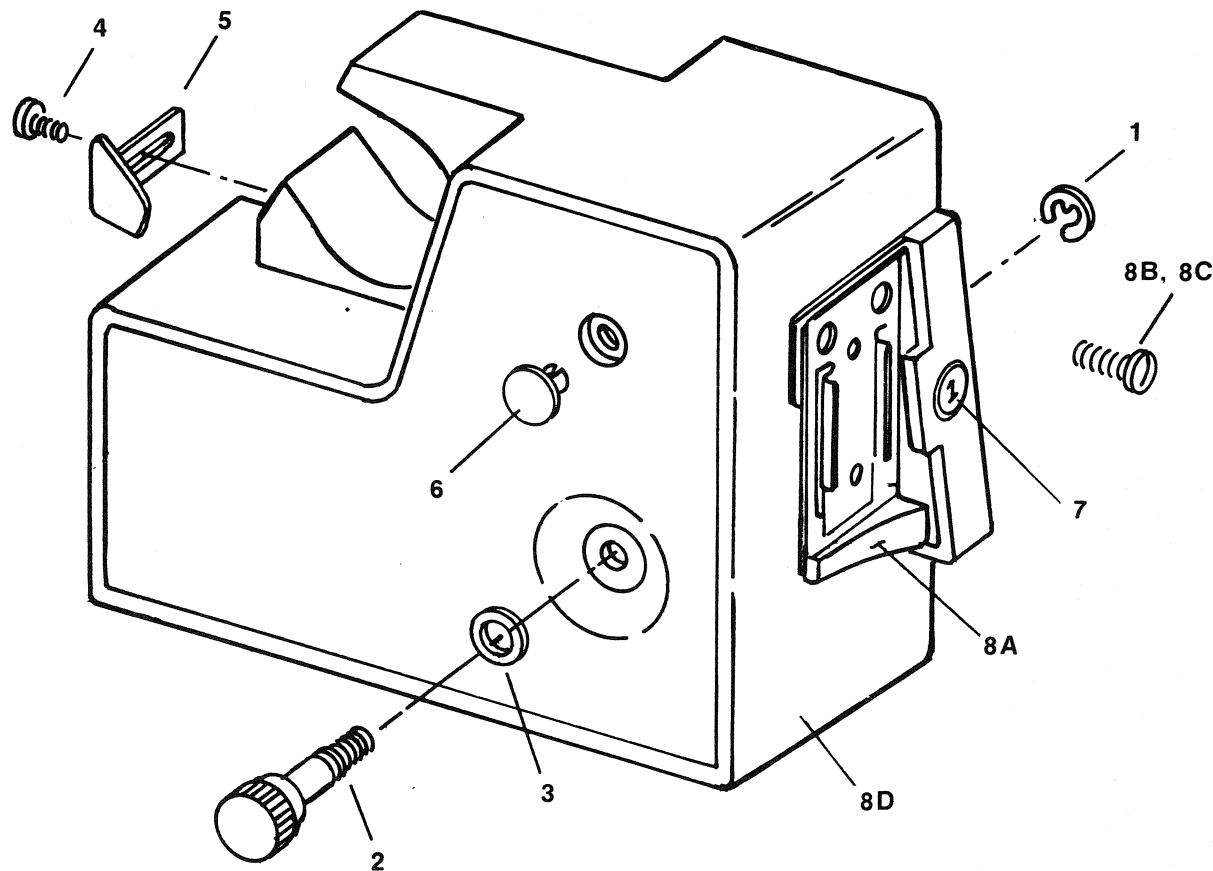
EXCITER LAMP COVER ASSEMBLY
